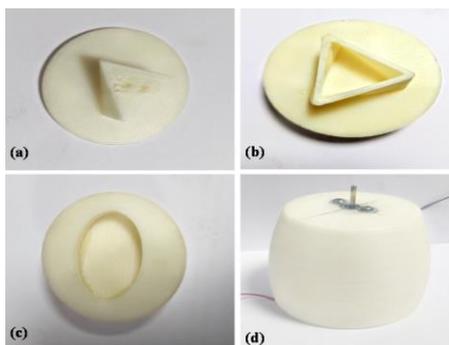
3D Printed Parts of Vortex Mixer (a) Shaft connector (b) Sample holder connector (c) Sample holder (d) Body case.
